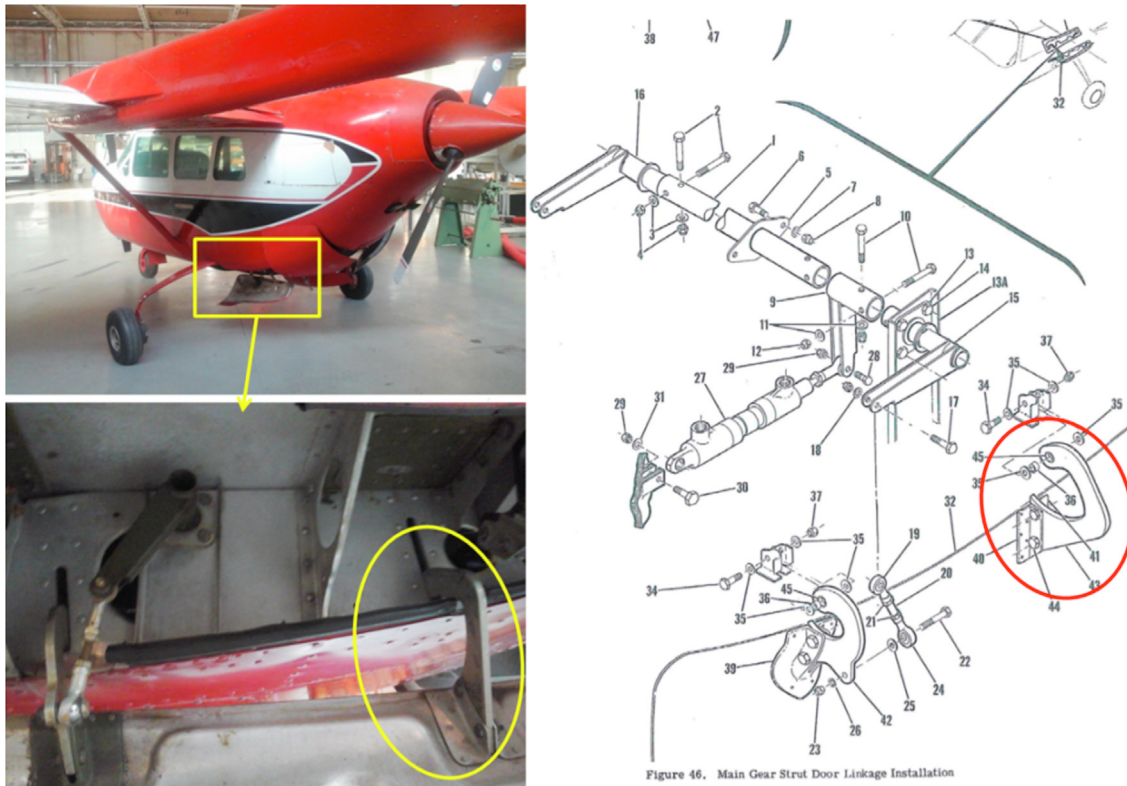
Cessna 337 and particular of the main gear door (left); Cessna illustrated part catalogue (Cessna, 1970) of the Main Gear Door (right), “aft hinge” part encircled.
